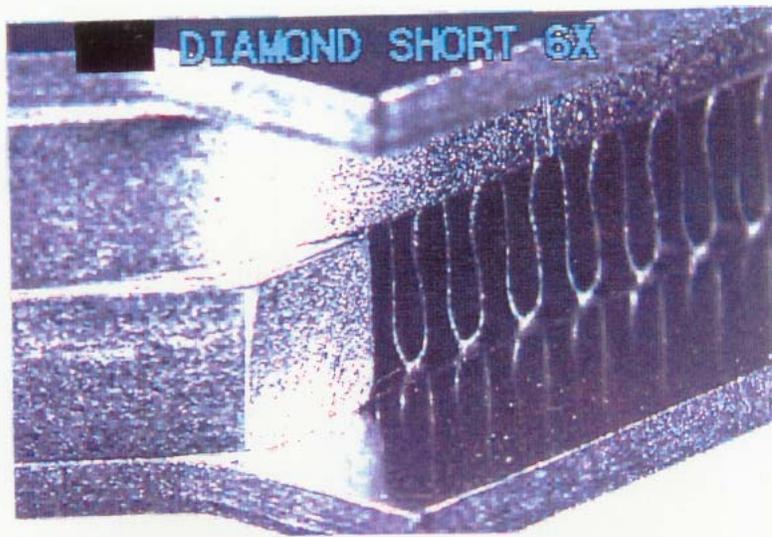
An Inconel625 heat exchanger brazed using MBF-51 foil.
